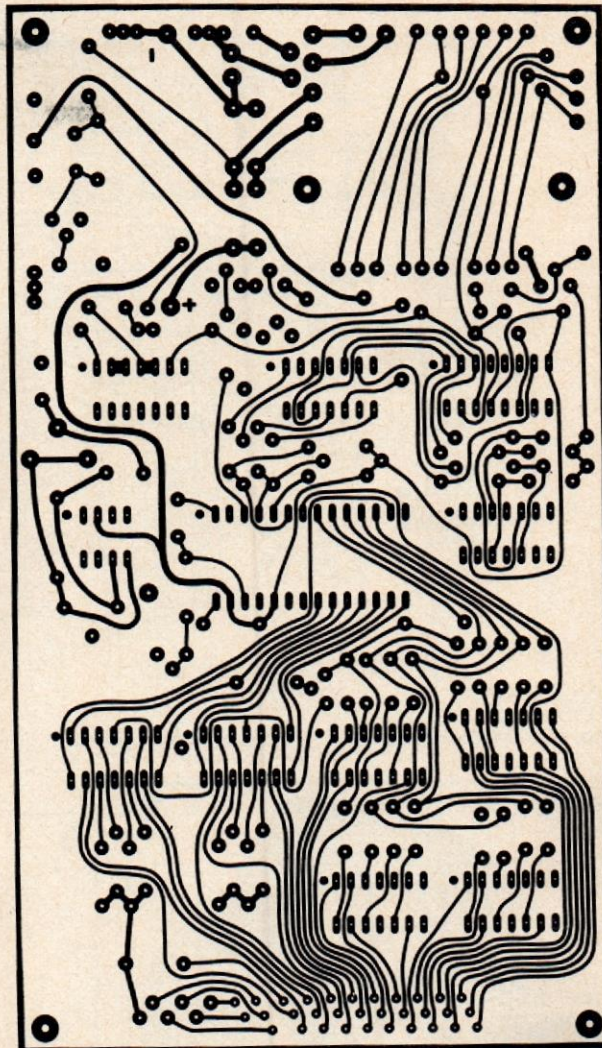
FOIL PATTERN of bottom side of double-sided clock board.
